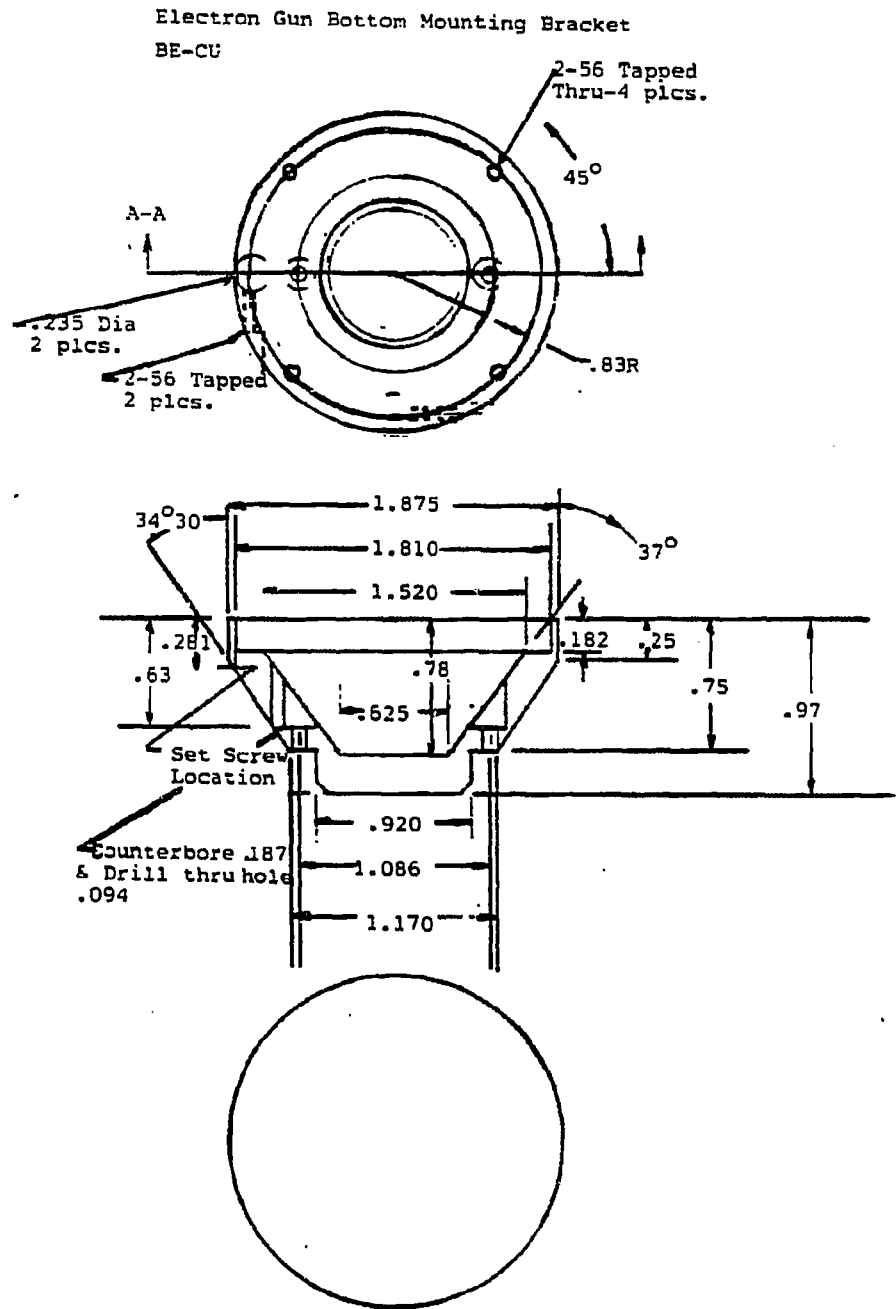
Electron gun base with four 2-56 holes tapped to hold the gun together and two counterbored holes for the gun mount on the QMA (see Fig. A.36).
